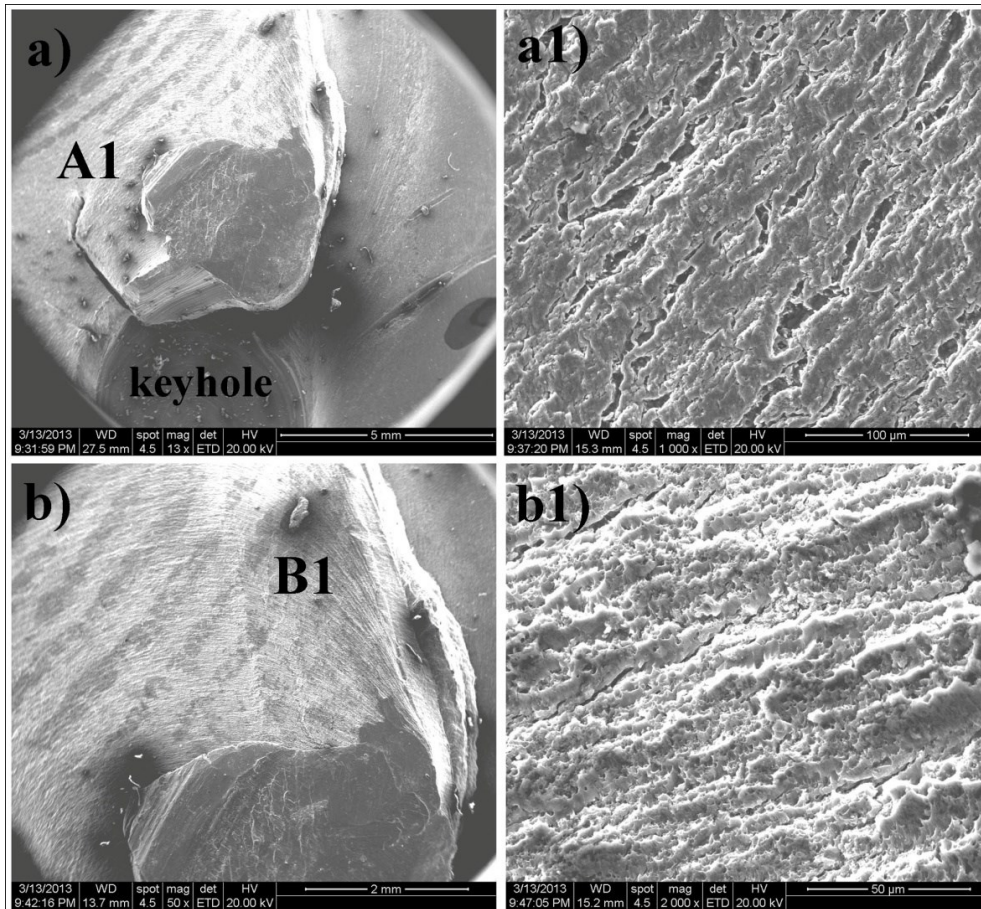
Typical SEM micrographs of fracture surfaces in WFSSW joint (a), (b) shear fracture surface of lower sheet, (a1) and (b1) magnified views at points at A, B in (a) and (b) respectively.
